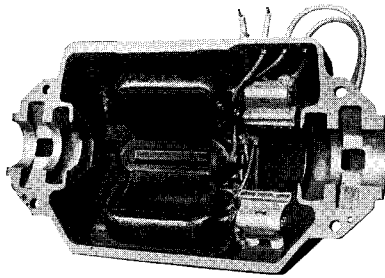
UPPER HALF OF TYPE MC MOTOR FRAME
